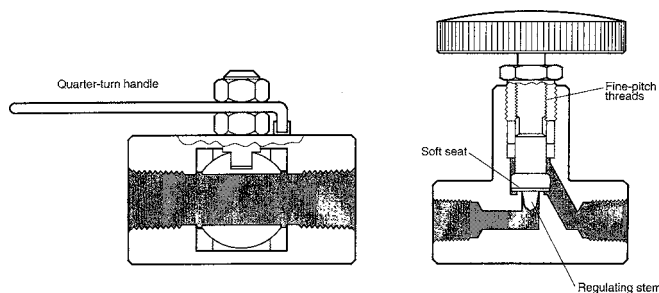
Ball Valves and Plug Valves Are Quick-Opening (left), Requiring Only a Quarter Turn to Go from Closed to Wide Open. Needle Valves (right) Are Designed to Open Slowly, with Fine-pitch Threads, Regulating Stems for Gradual Opening, and Soft Seats for Gas-Tight Shut-off
